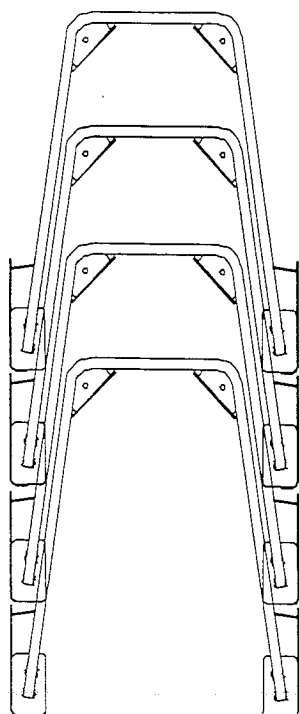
Nesting style, A-Frame chassis form (version 1), plan view
